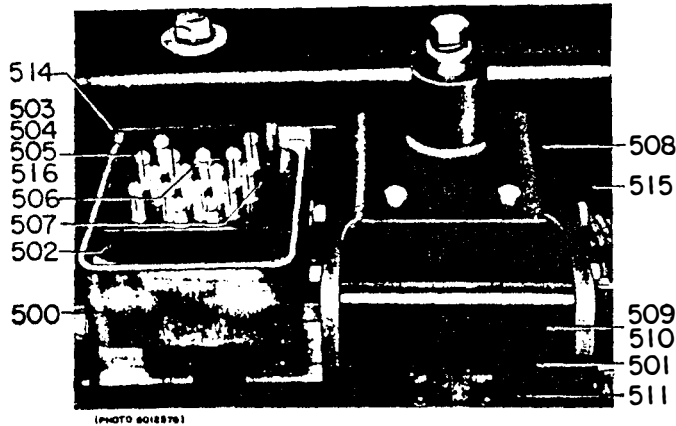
A. Front view of type MS-13 mechanism for the type AM-4.16-2 breaker
